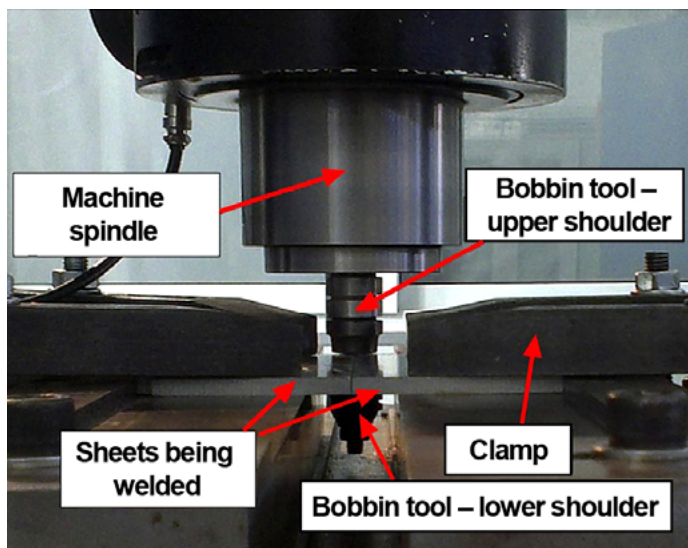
Station for the butt welding of sheets using the FSW method and the bobbin tool [1]
